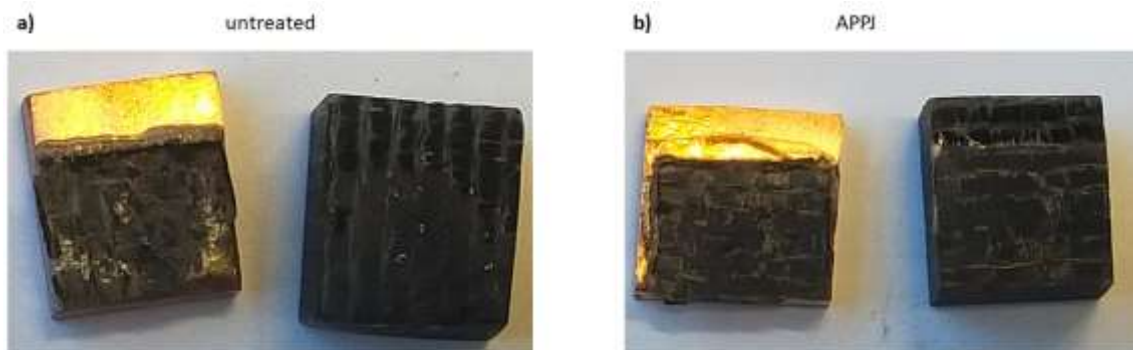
fracture surfaces of untreated C/C-copper (a) and APPJ C/C-copper (b) joints
